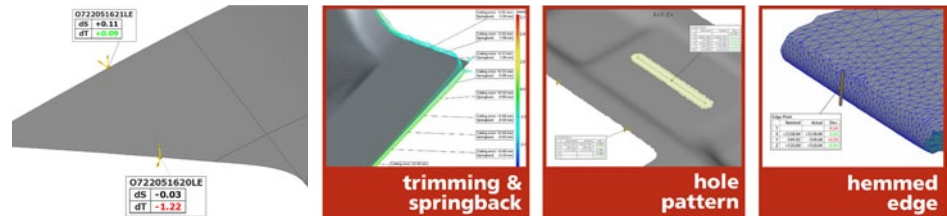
Analysis of trim and springback, CAD edge, Inspection of hole patterns, Checking a hemmed edge
